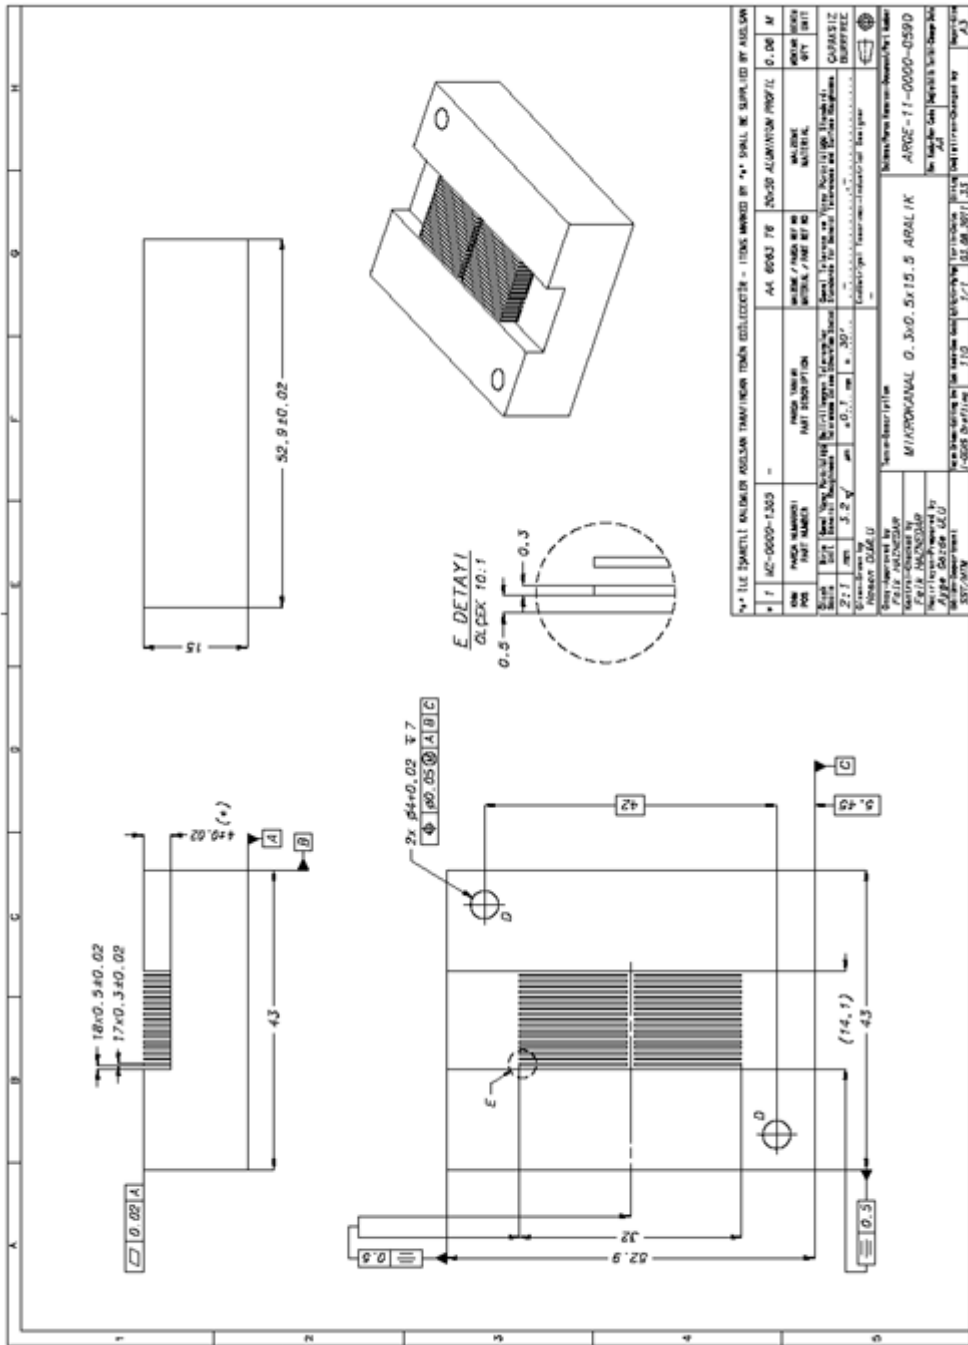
Technical drawings of 500 micron wide single interrupted channel
